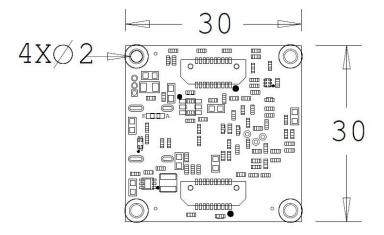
Front Portion of See3CAM_CU30_CHL_TC Base Board mechanical dimensions
